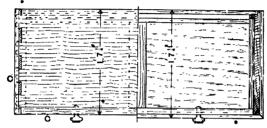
Half Plan and Section of Drawer Pedestal of Combination Wardrobe Bedstead
